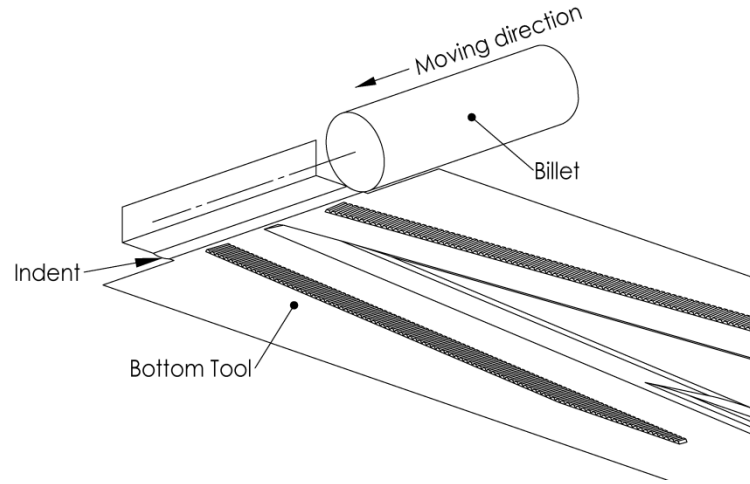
The schematic of the actual CWR process and workpiece installation using an indent on the bottom tool (Tool-3).
